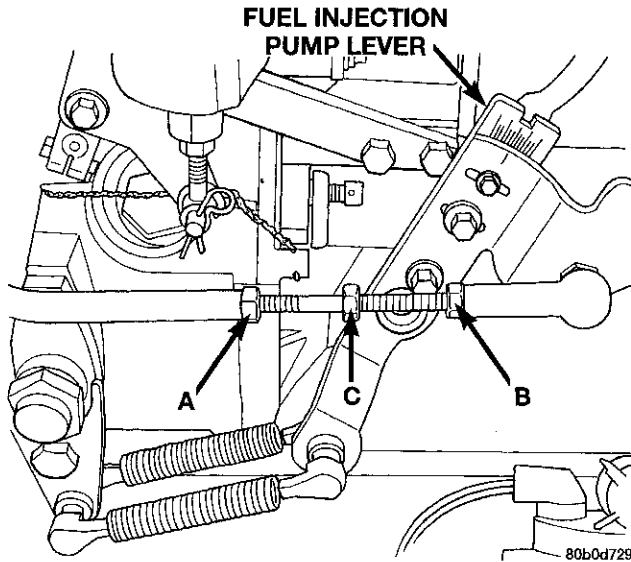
Throttle Lever Linkage Rod Adjustment—Diesel
